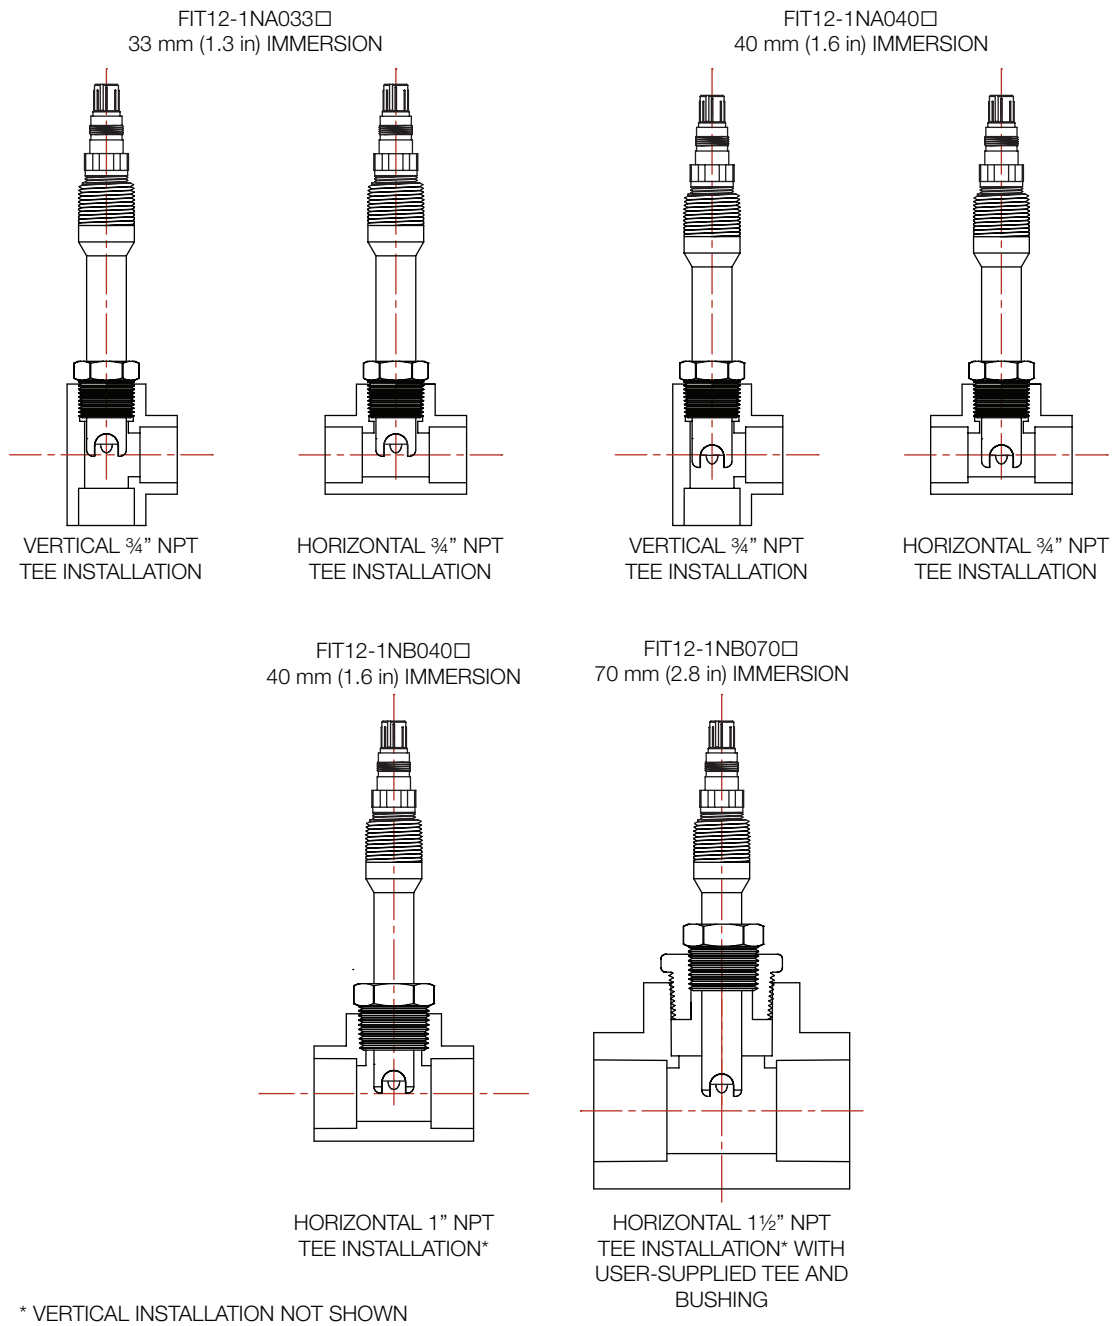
NPT Installation With Sensor Holder and Standard User-Supplied Tees and Bushings
